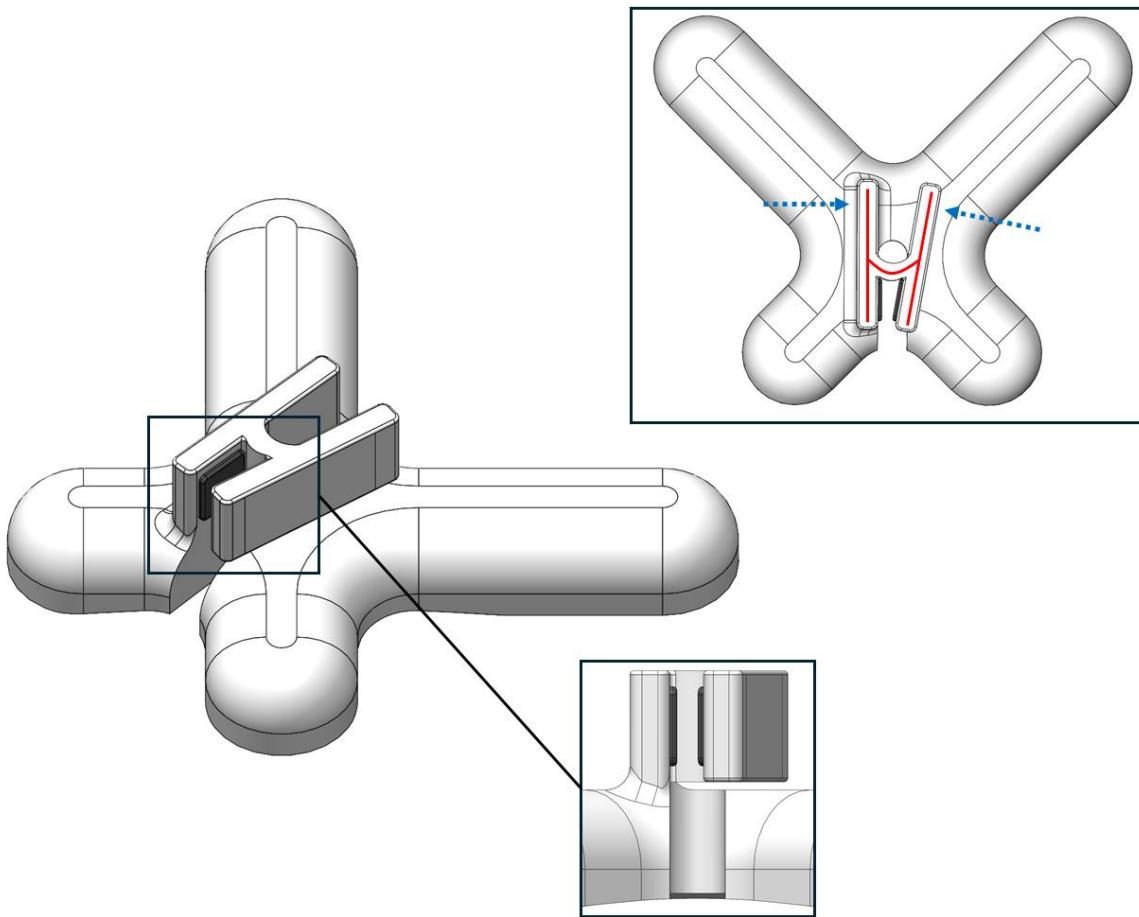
Back Stabilizer CAD model, which features the compliant mechanism, the extended back legs, as well as the two parts that make up the Back Stabilizer assembly (Back Stabilizer base and rubber pads)
